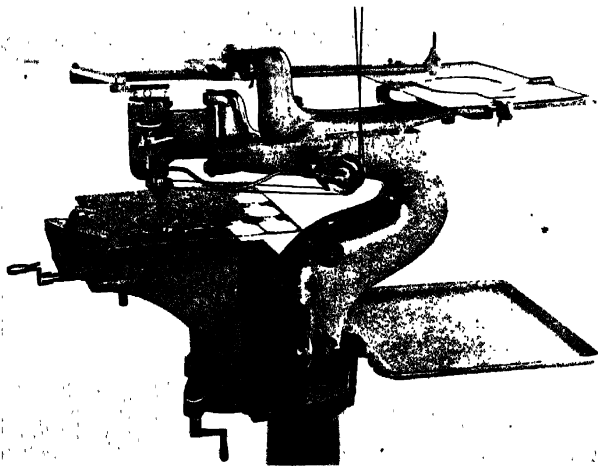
Pantograph machine cutting out shapes, under control of a celluloid master copy.
